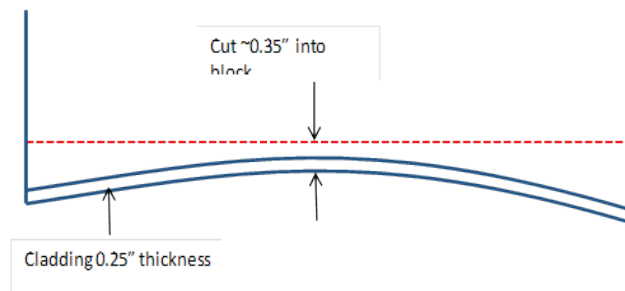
Sketch of 5/16" cladding cut off the Zion Unit 1, Segment 1 blocks [17].
